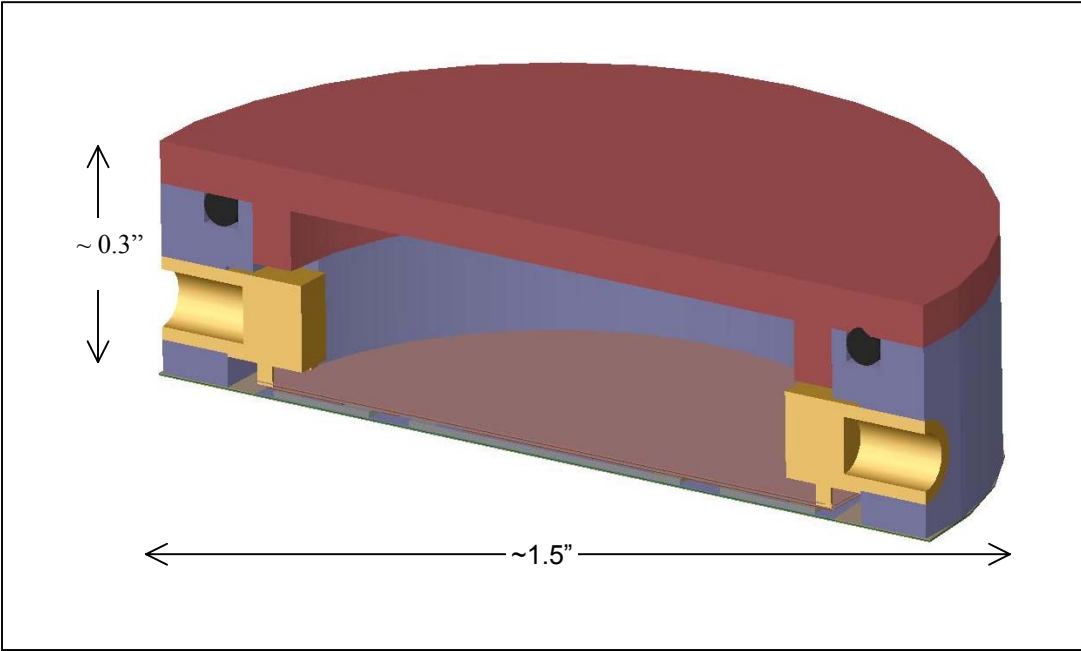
Cross section view of assembled SHM device, roughly 3x scale.
